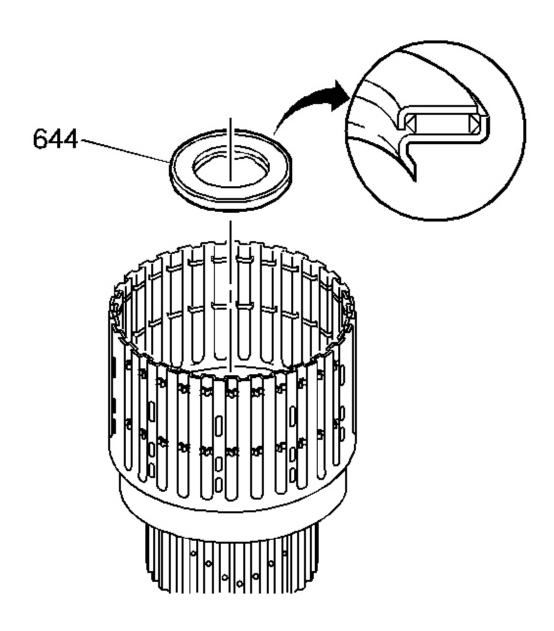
Locating Input Shaft Thrust Bearing Assembly Courtesy of GENERAL MOTORS CORP.
